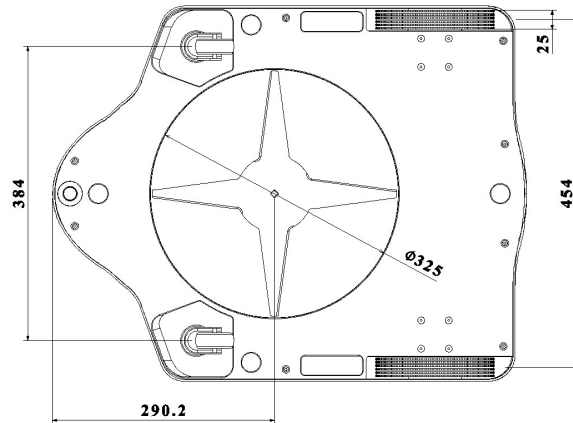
Main Dimensions of the Autonomous Lawn Mower (Bottom View)
